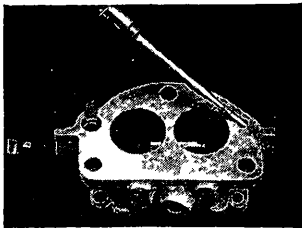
Remove throttle centering screw, then throttle shaft and lever. Check shaft for wear, loosen lever and throttle rods in lever for wear
